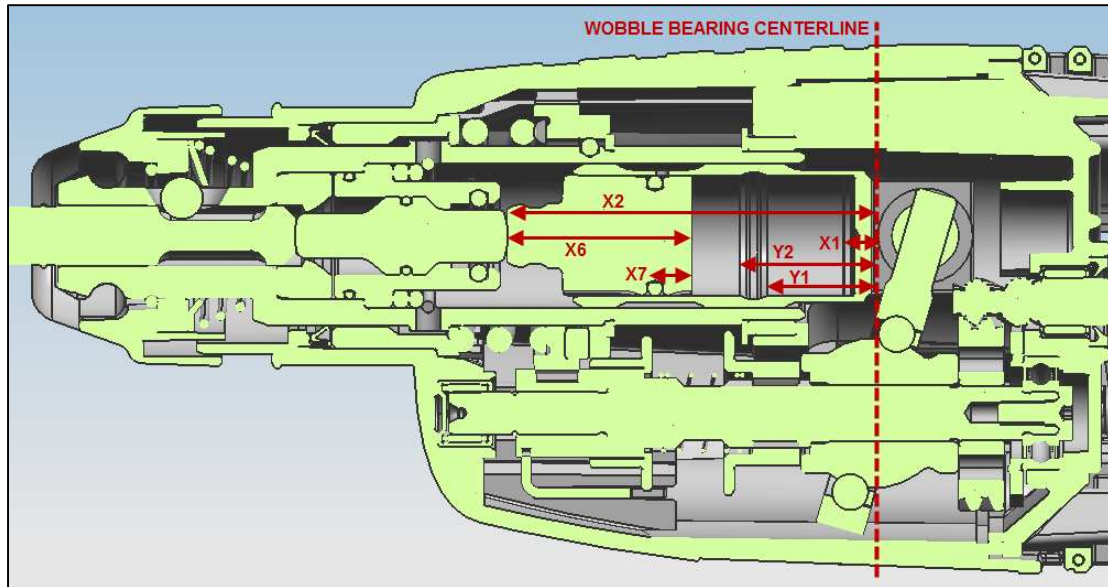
Tool mechanism cross section, 5262-20 rotary hammer
